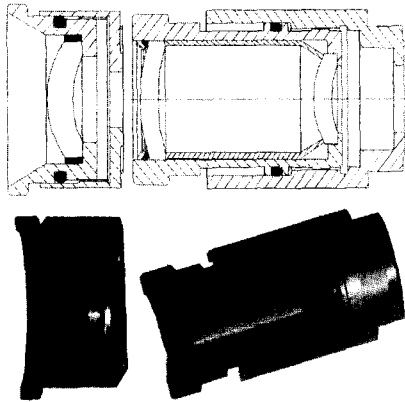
Assembly and Perspective drawings of SA and DA system.
